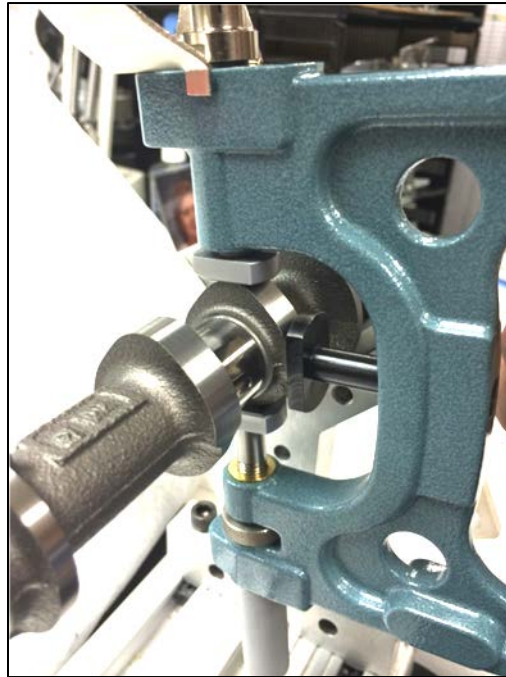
Positioning the Snap Gage to Measure the Camshaft Heel-to-Toe Height
